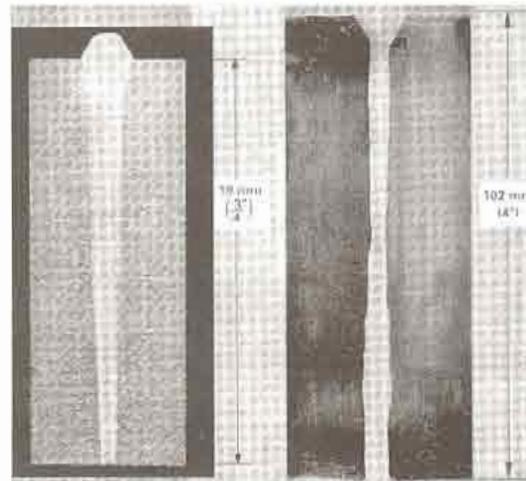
(Left to right) Electron-beam welds in 19-mm-thick 7079 aluminum and 102-mm-thick stainless steel. (Courtesy of Hamilton Standard Division of United Technologies Corporation, Hartford, CT.)
